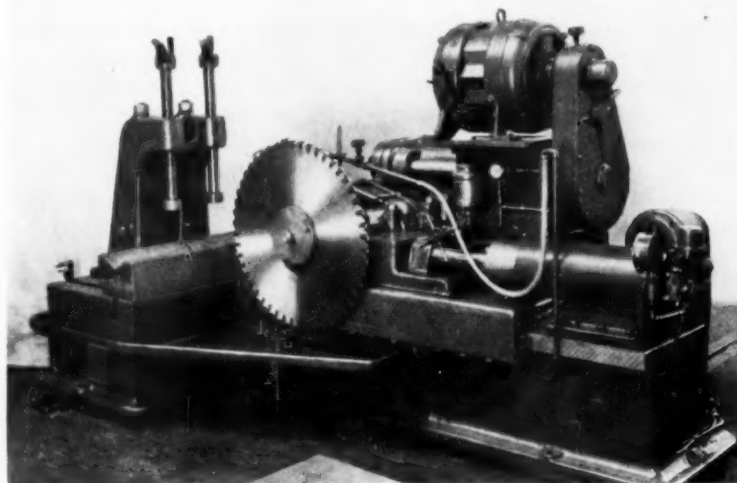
COLD SAW WITH HYDRAULIC FEED
